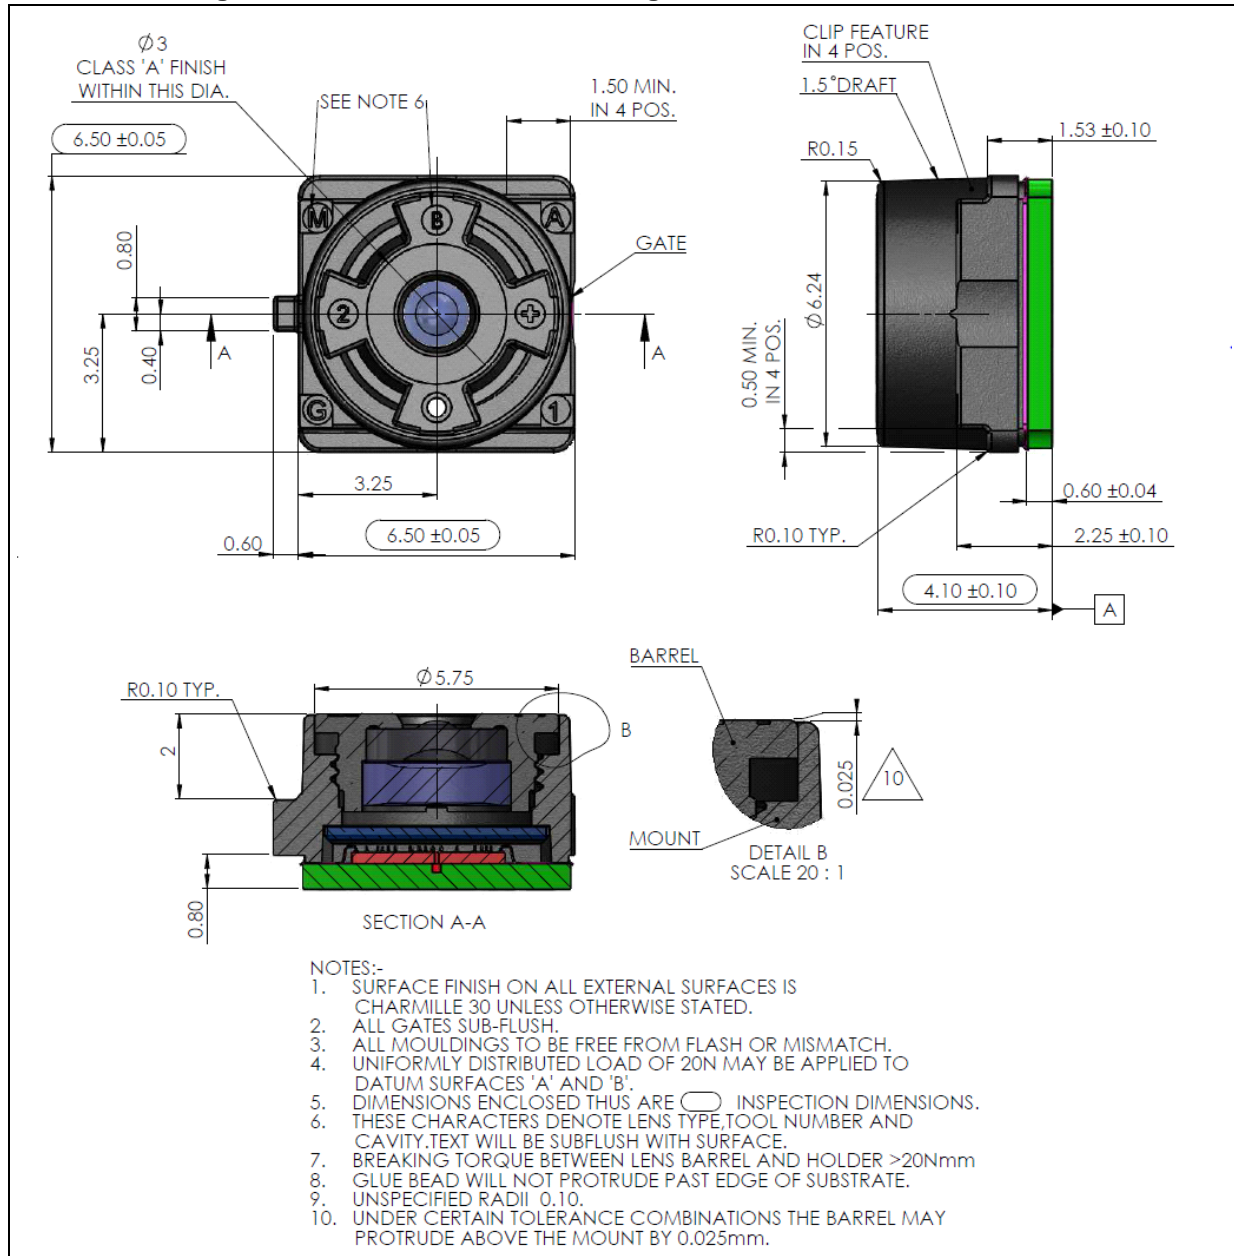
VS6663CD outline drawing - 2of 3 - All dimensions in mm
